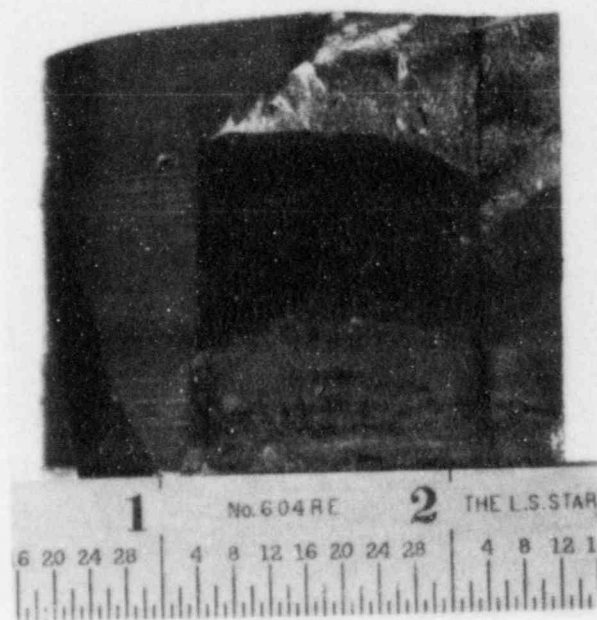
Fracture Surface of KS07R Weld Crack from Core B1.
